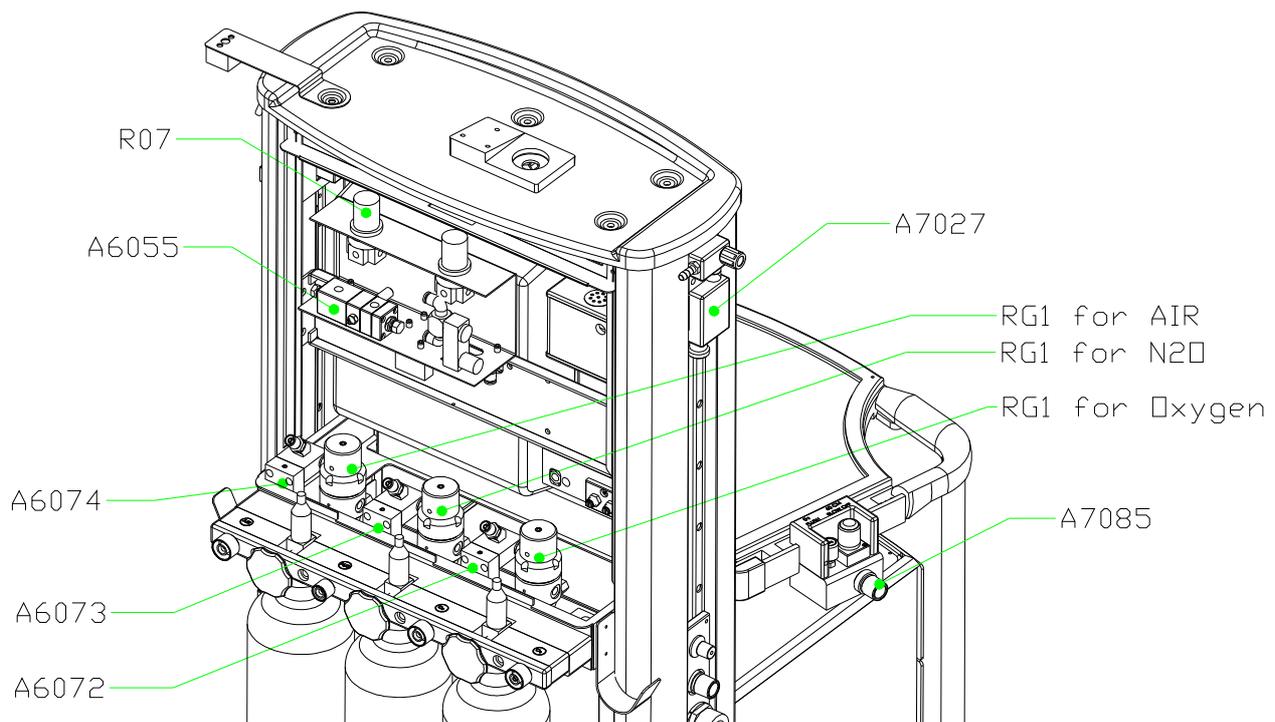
Location of A607X Manifolds on Anaesthetic machine
